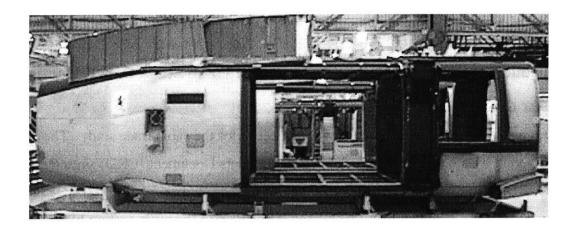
UH-60 BLACK HAWK Cabin Assembly
